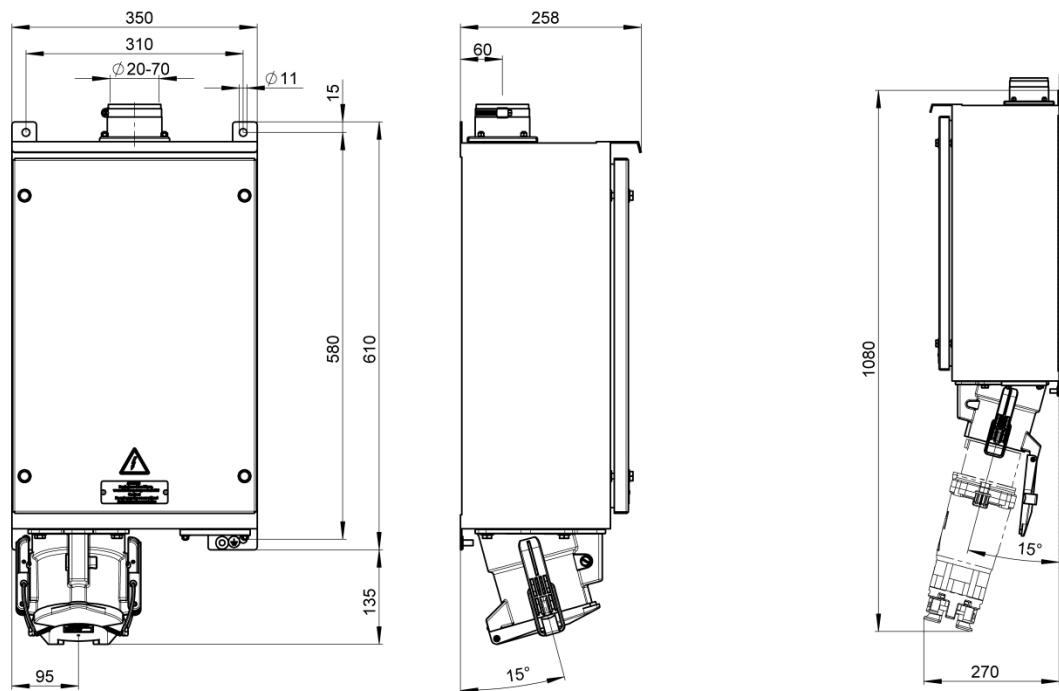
Dimensions, Connector Unit with Block Contactor CUBC C-Line (200A – 250 A) in mm
